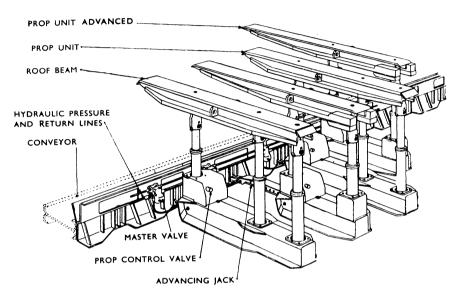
Dowty self-advancing roof supports. (Dowty Mining Equipment, Ltd.)
